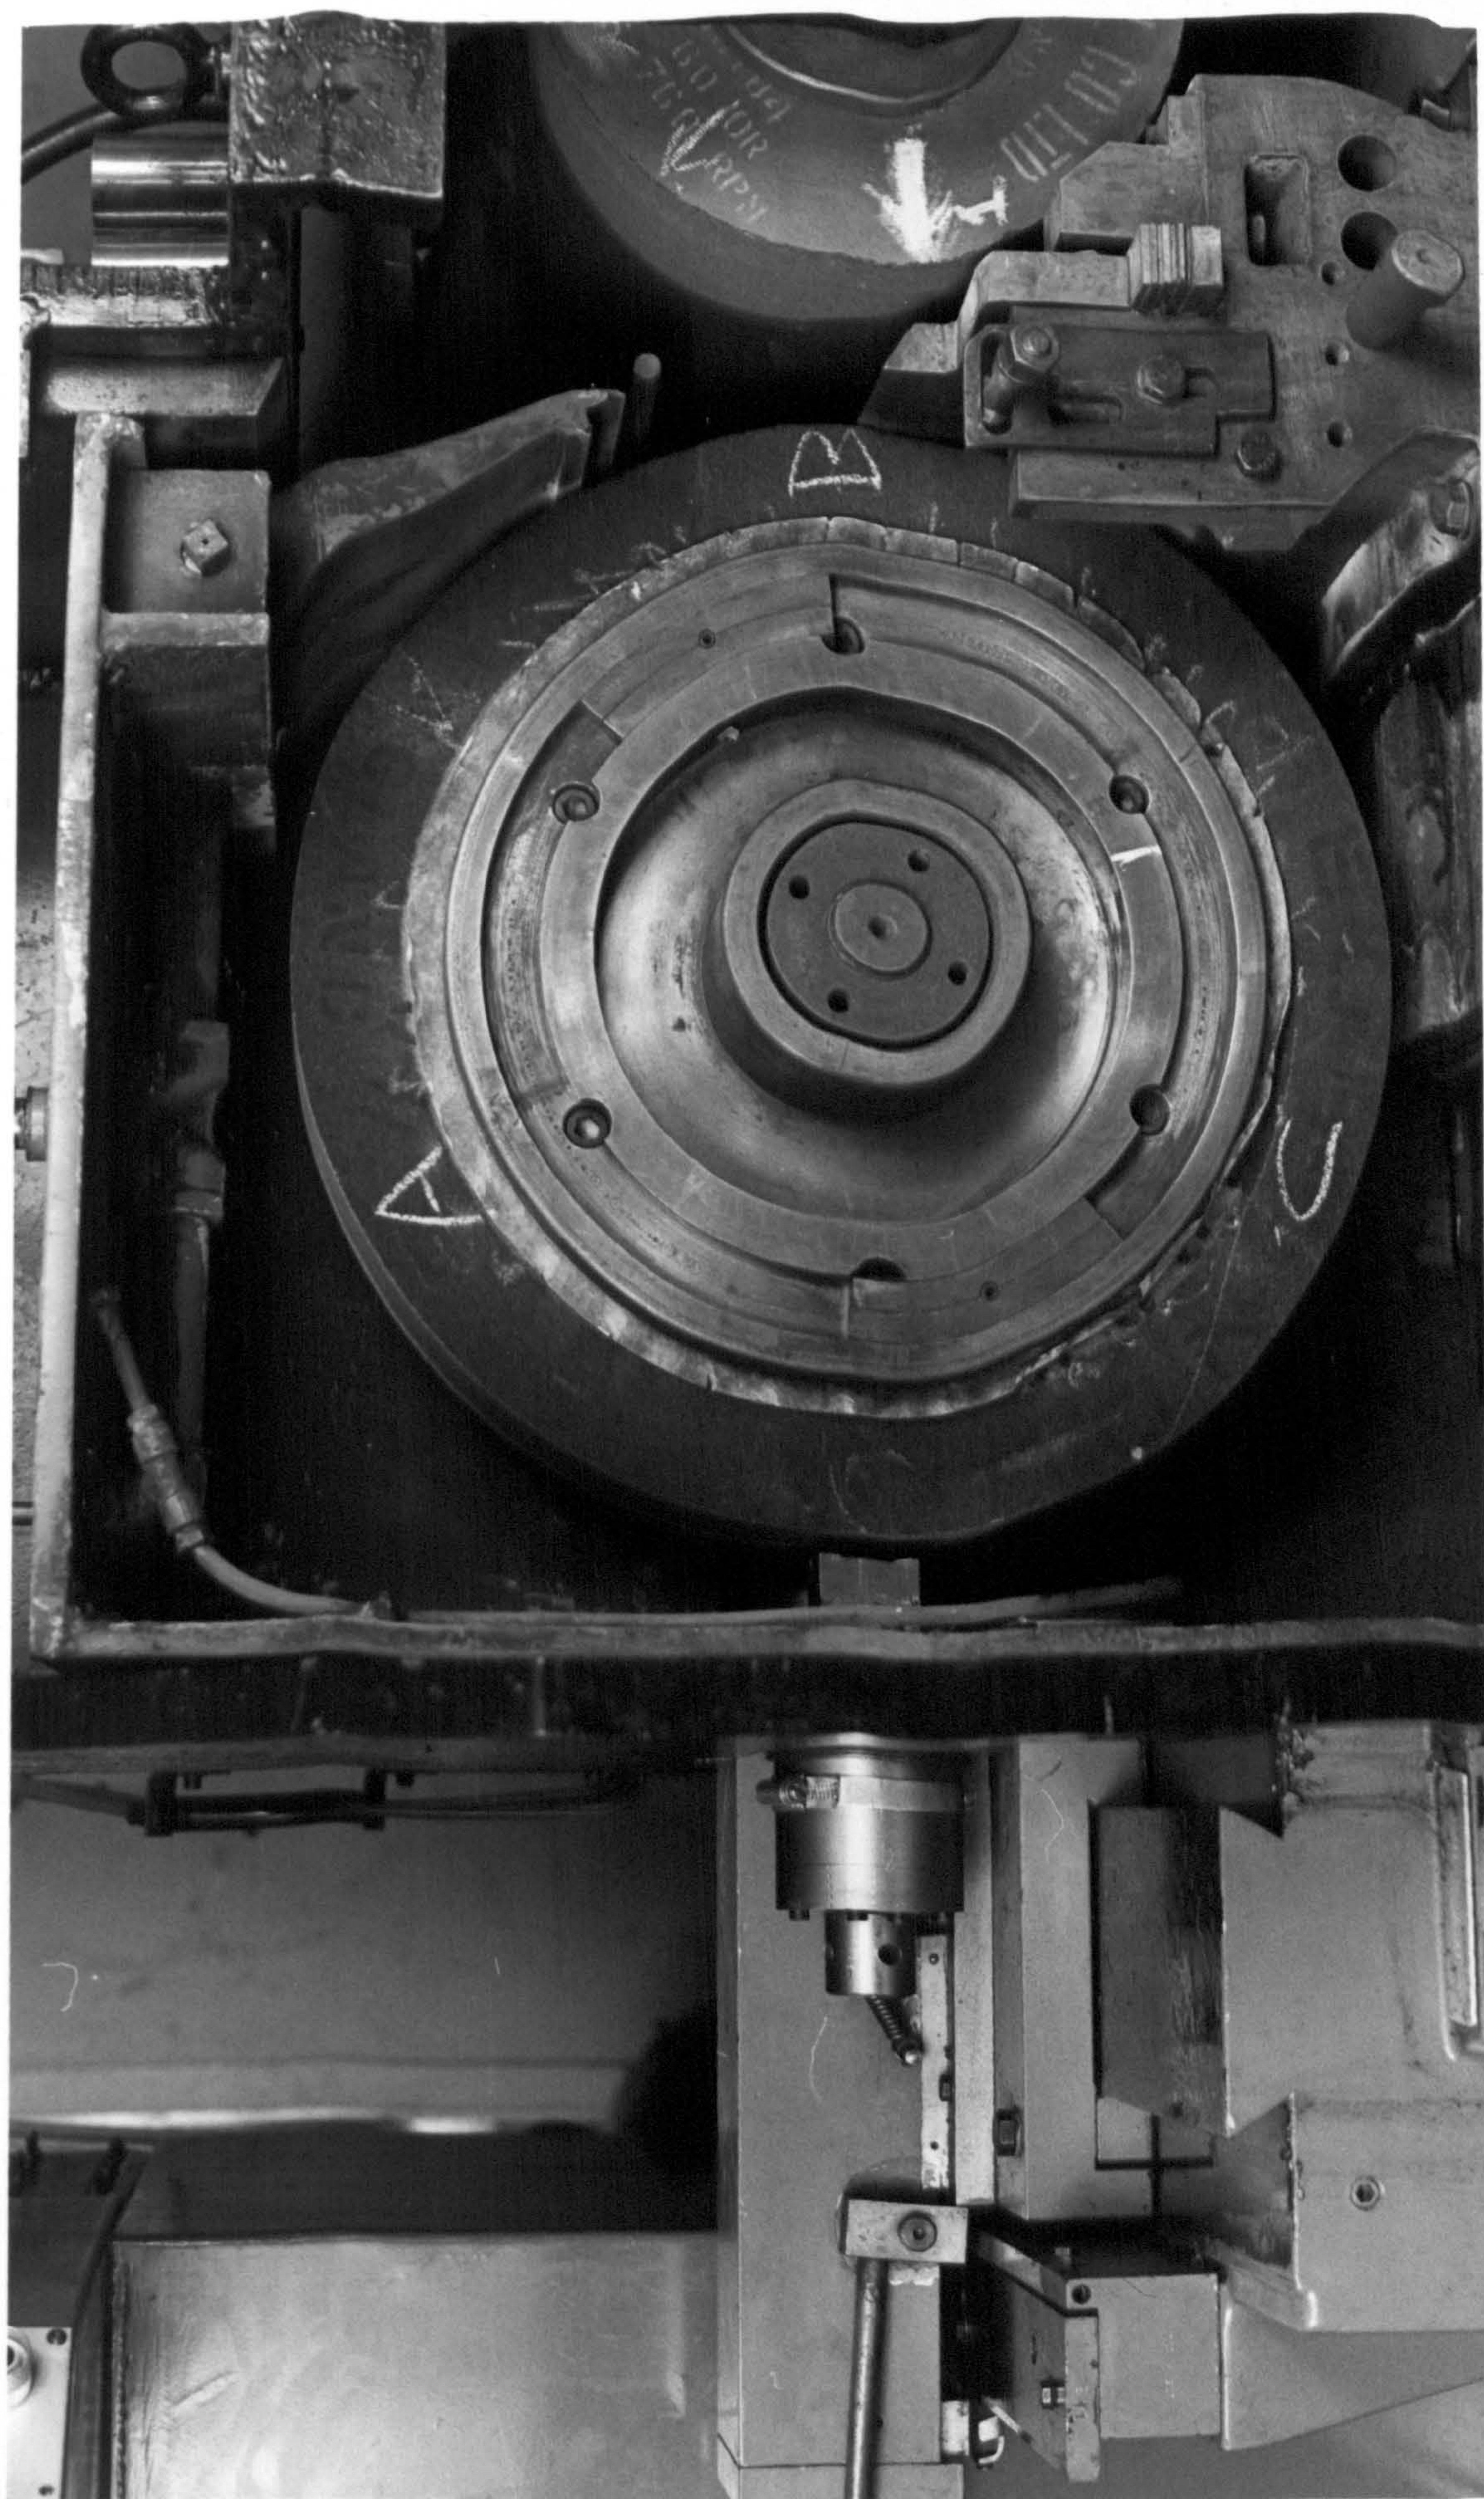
GRINDING WHEEL SURFACE REPLICATOR FITTED TO THE GRINDING MACHINE.
